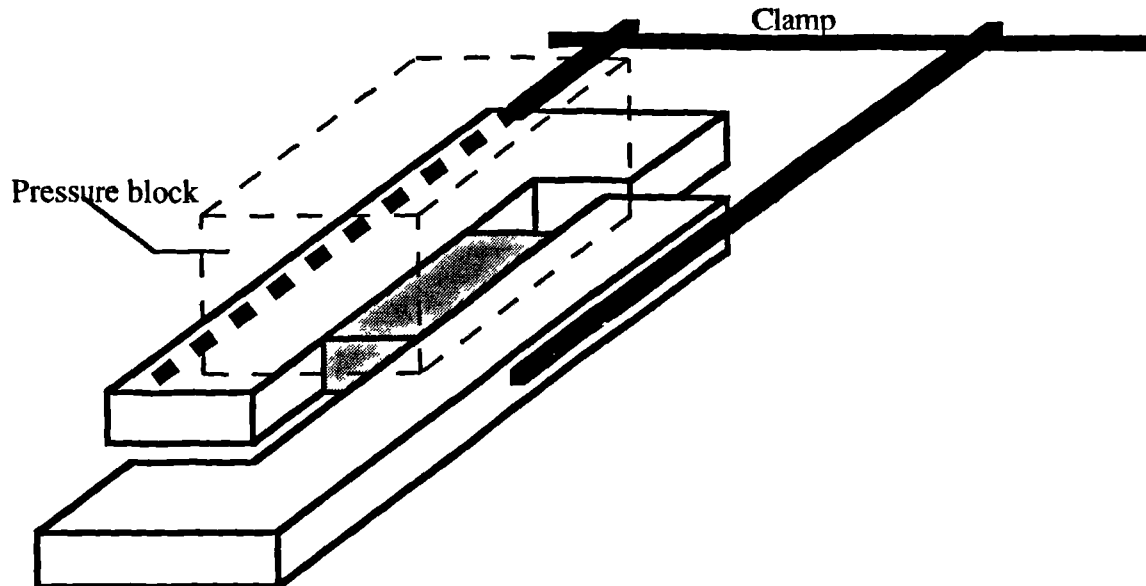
Bonding set-up for the parallel sided block specimen
